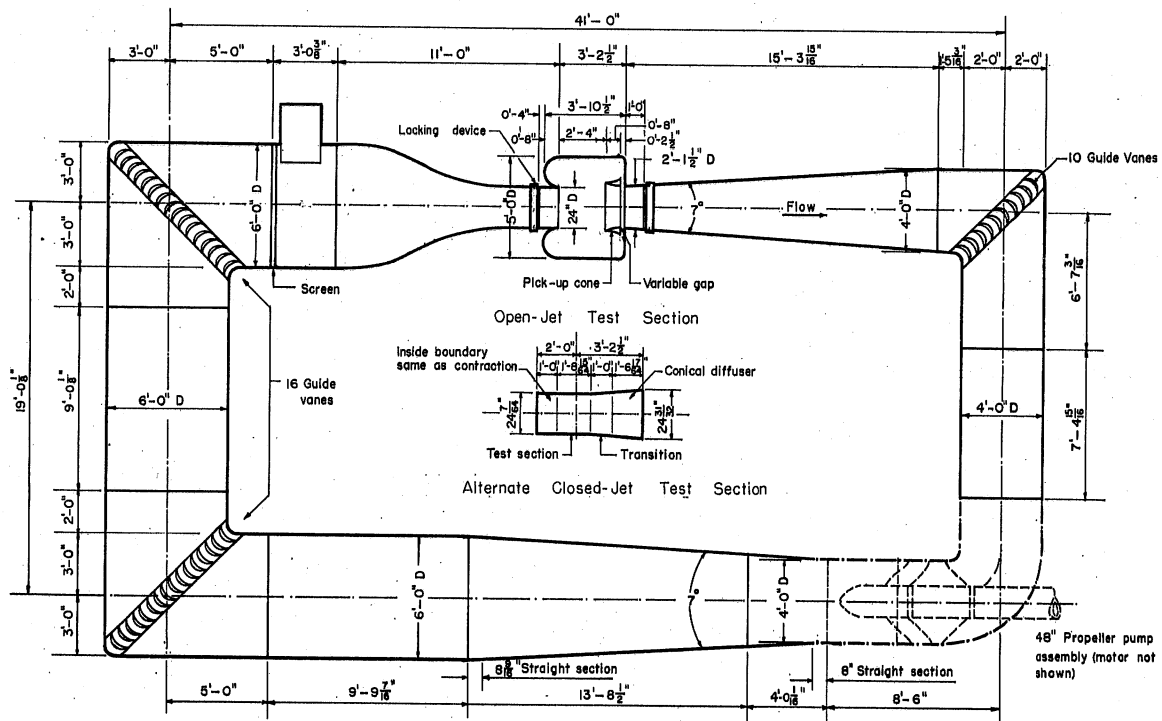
Sketch of Revised Design of Proposed Prototype Water Tunnel
